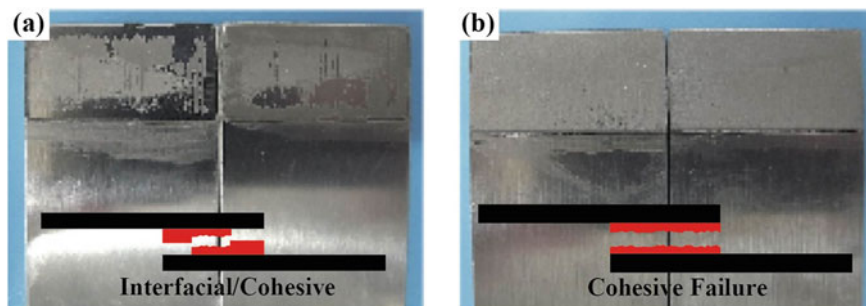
Photographs of fracture surfaces showing interfacial failure with the degreased aluminum (a) and cohesive failure with the steam-treated aluminum (b). Reprinted with permission from [69]. Copyright 2022, Elsevier. All Rights Reserved
